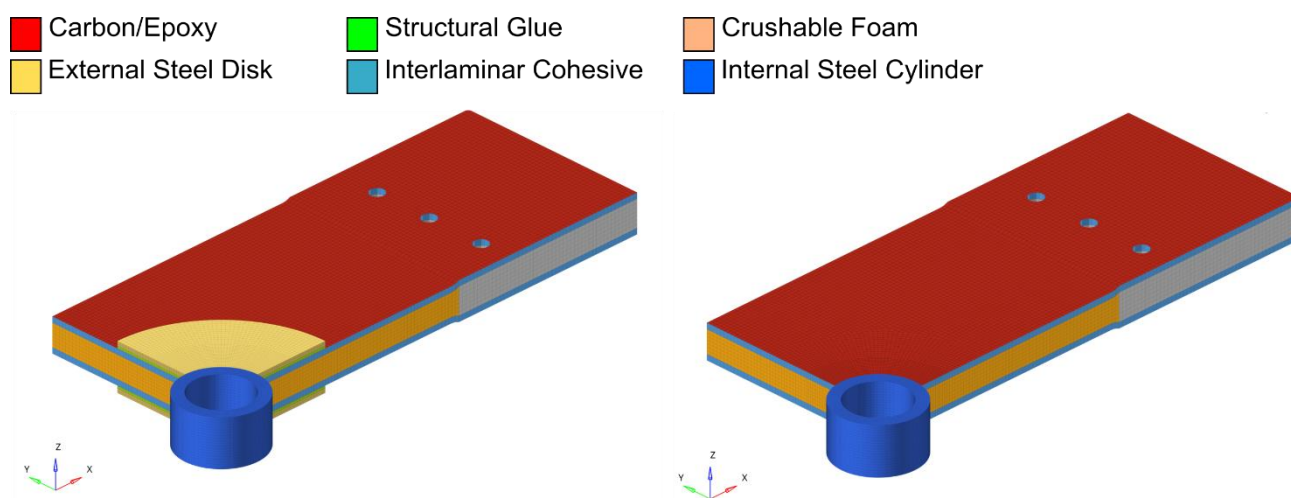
Section of proposed composite joint configuration: (SX) Advanced Joint; (DX) Simple Joint.
